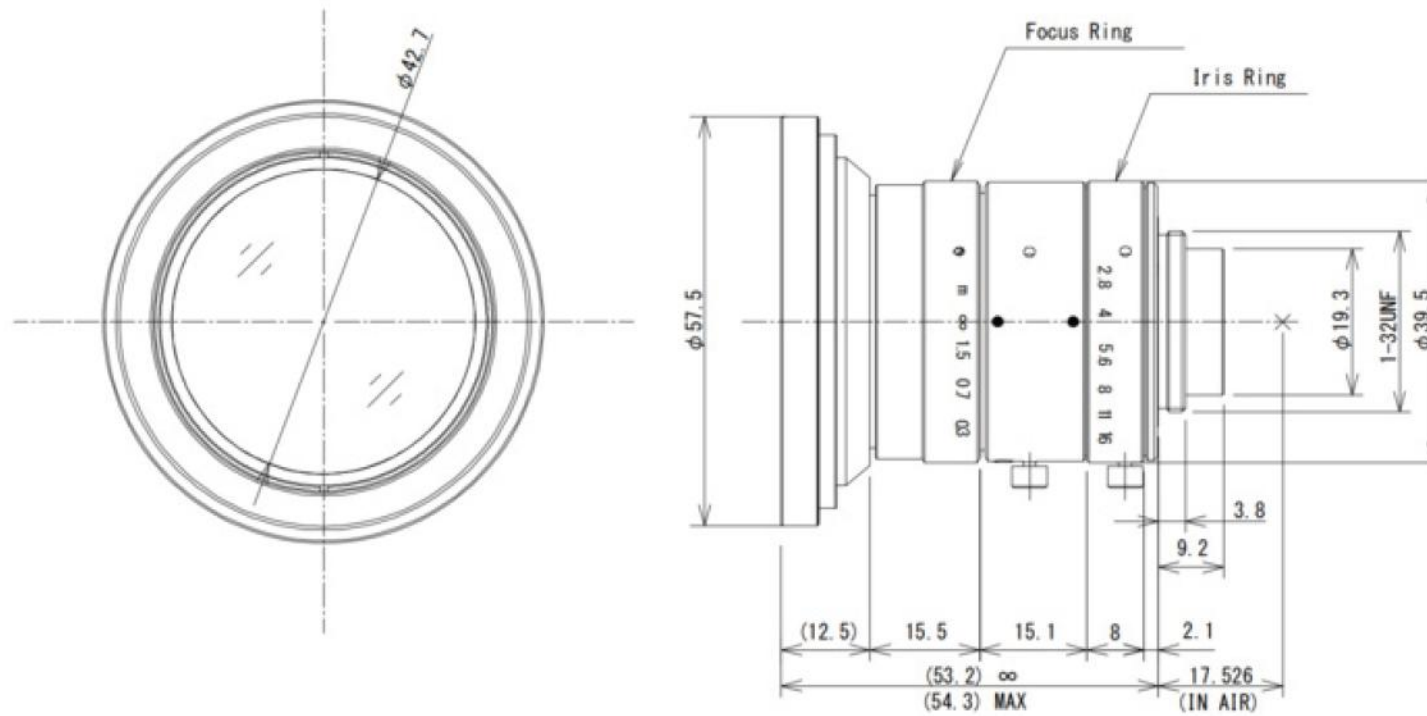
Camera Lens- Dimensions of Computer 8mm Low Distortion C-Mount Lens
